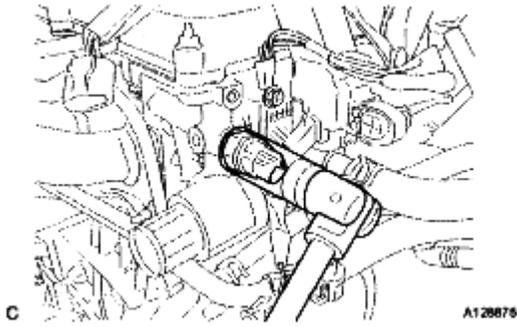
Removing Engine Oil Pressure Switch Assembly
